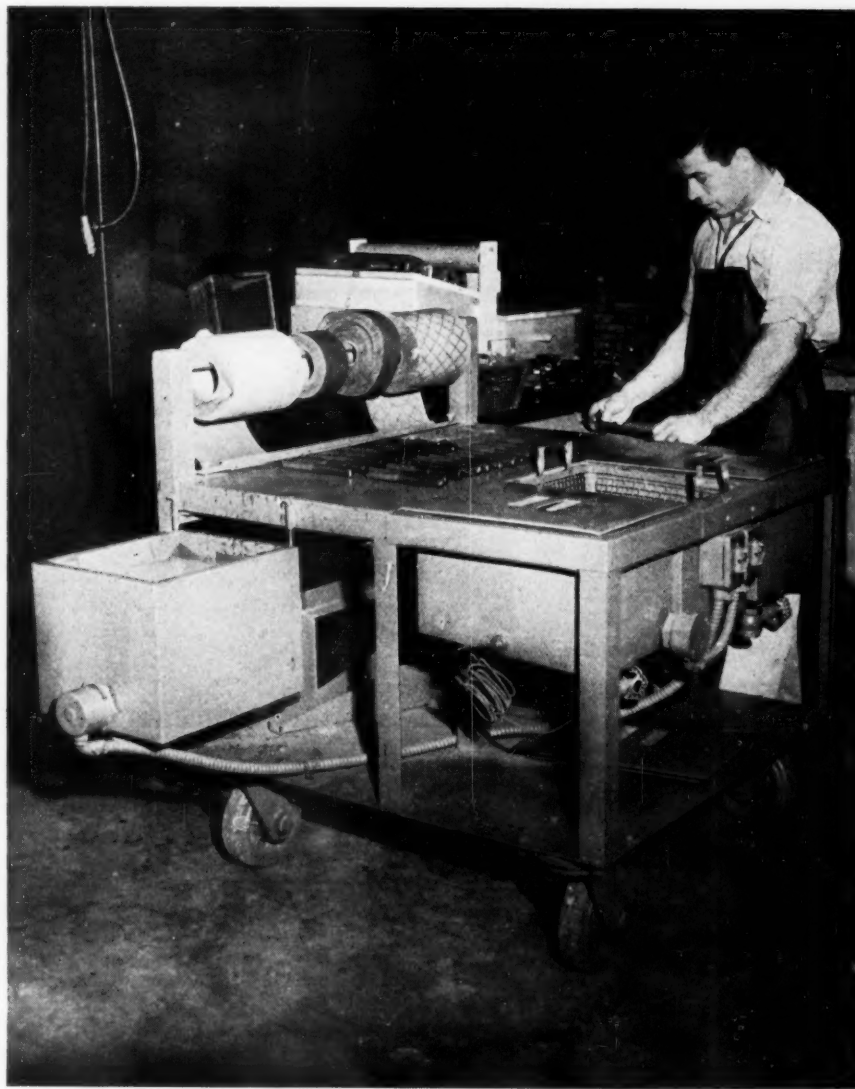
Mobile represerving and packing table for small parts shown in use.
